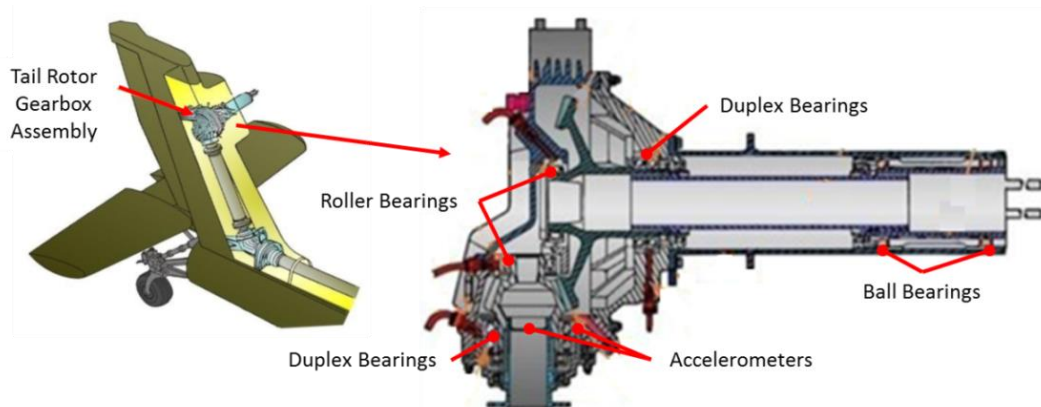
AH-64D tail rotor gearbox location & assembly layout [4]
